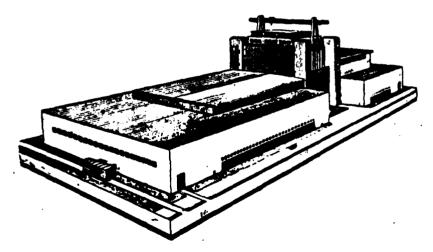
Hydraulic stamping machine by effort/force 68000 t with the reinforced-concrete mounting, built in the building of plant
